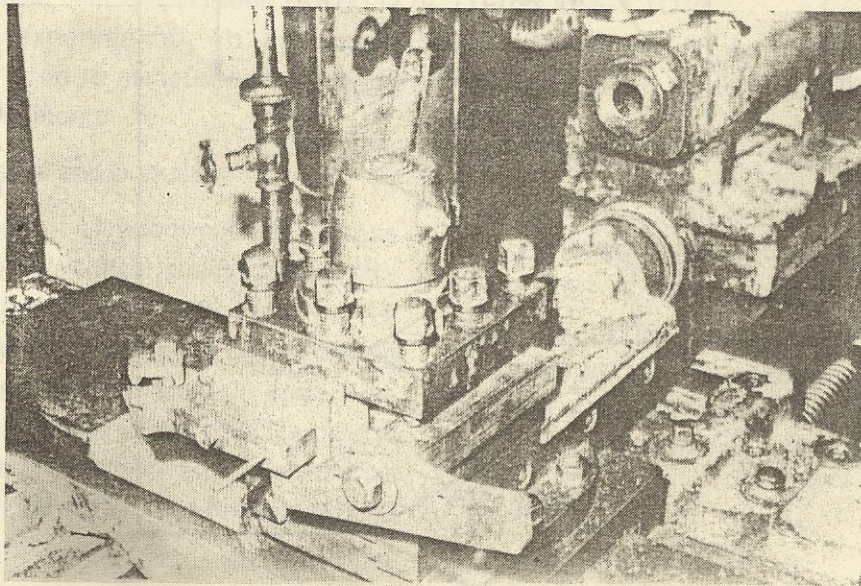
Dropping Tool Apparatus fitted in the square turret of the lathe during cutting operation.
